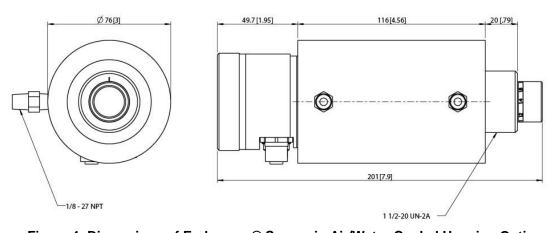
Dimensions of Endurance® Sensor in Air/Water-Cooled Housing Option
